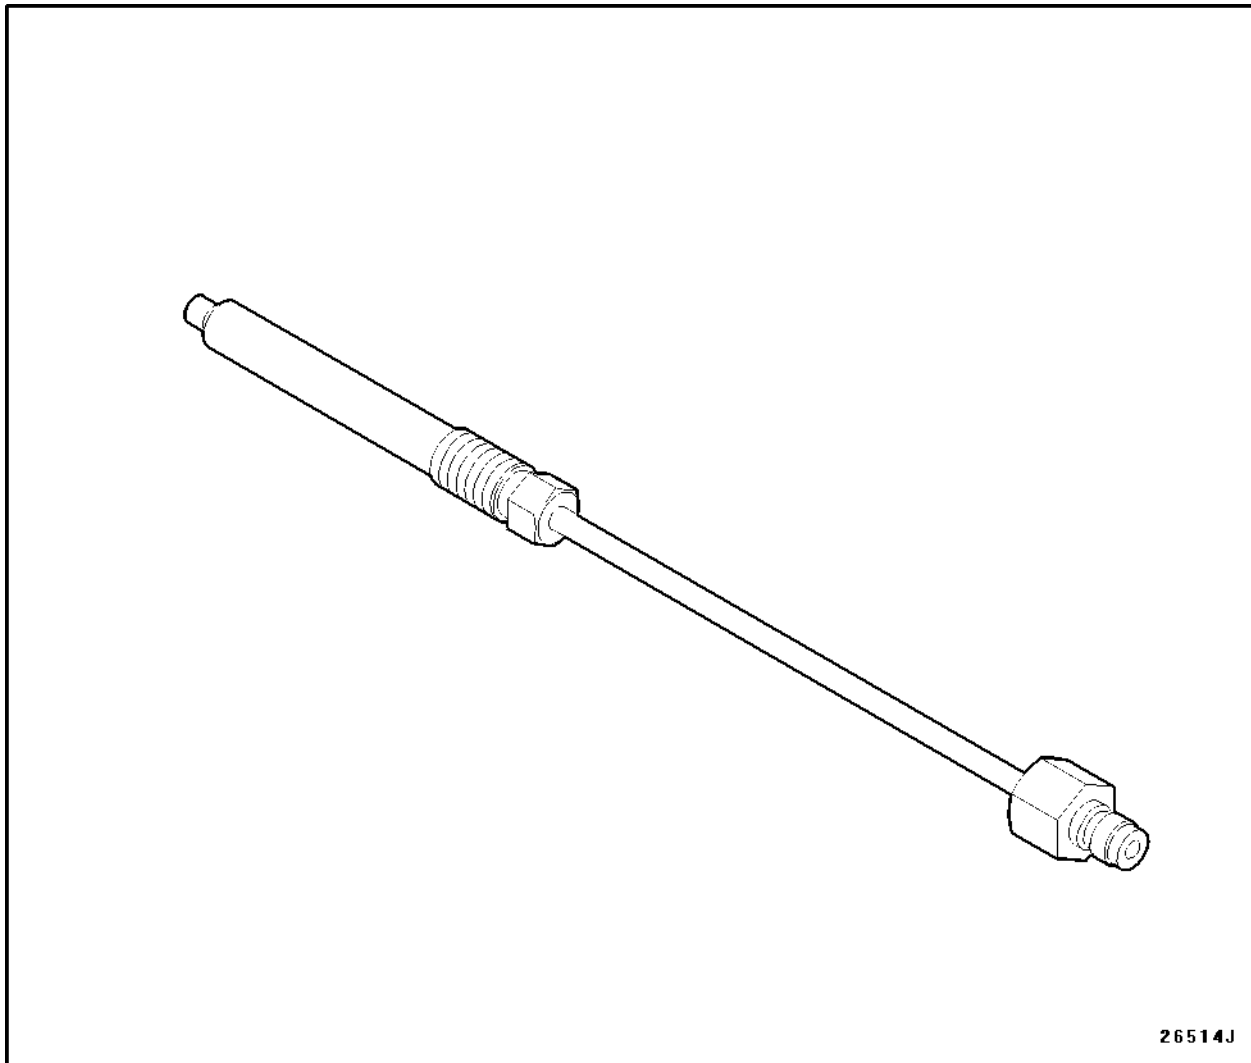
Crankshaft Cup Plug Installer,J 41960
